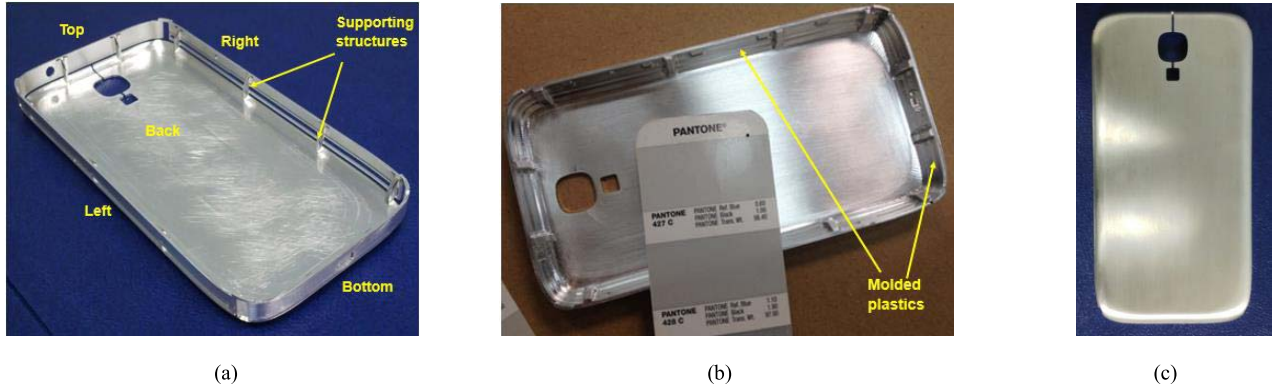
Fabrication of a metal body. (a) Before plastic molding. (b) After plastic molding. (c) Finished metal cover.
